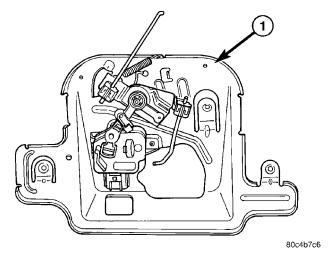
LIFTGATE CONTROL ASSEMBLY INNER PANEL
